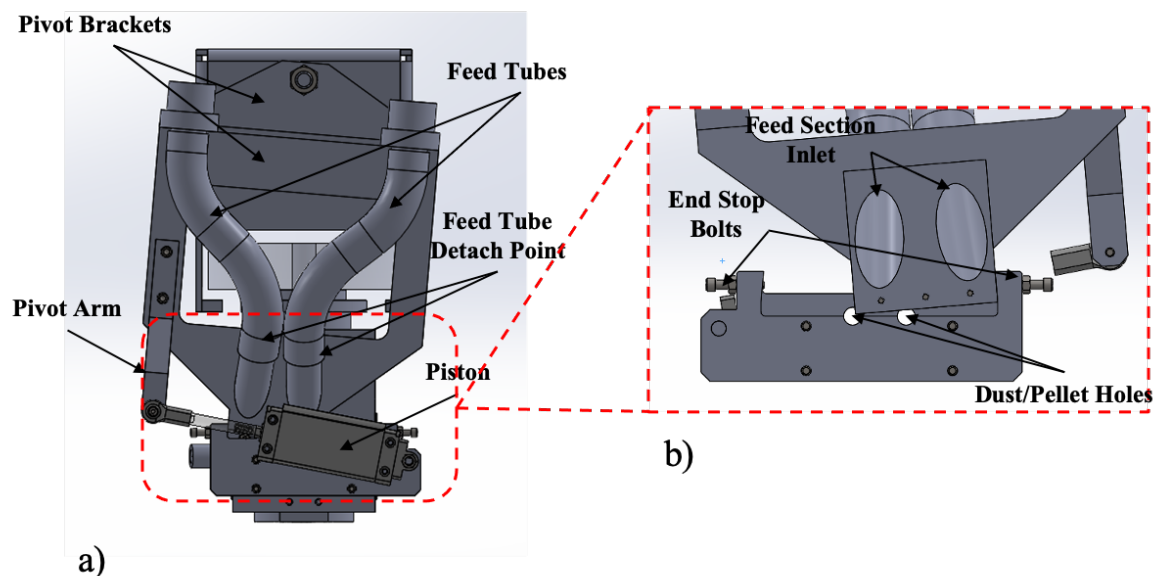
Design for dual material switching mechanism integrated to the BAAM system; a) CAD drawing showing the dual hopper/feeding tubes, sliding mechanism, and controlling piston, and b) Cross section at the extruder entrance showing alignment and dust removal features
